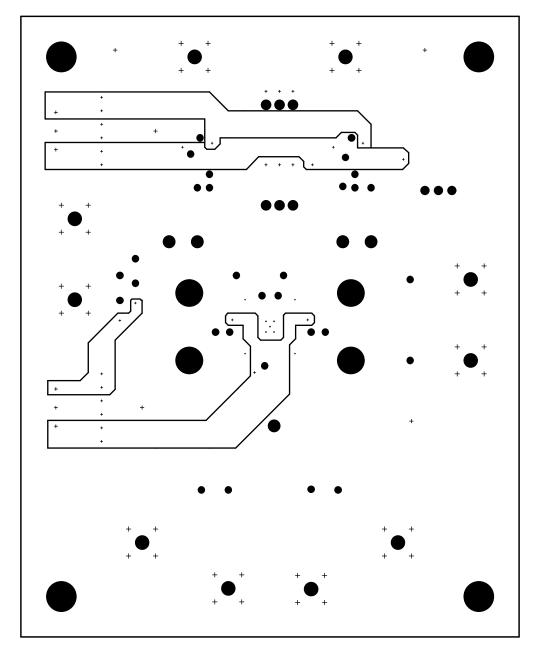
VCA2617EVM PCB Power Layer (Top View)
